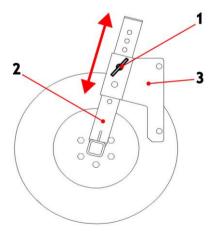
Adjustment of the support wheel (1 - working depth safety pin, 2 - support wheel height adjustment beam, 3 - support wheel beam adjustment handle)
